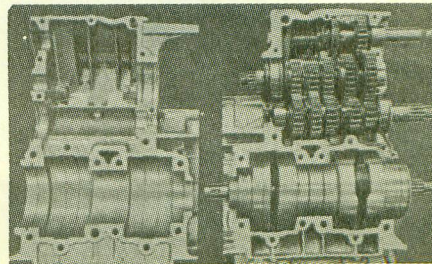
Gears and shafts should stay in place in the top half of crankcase when the lower half is lifted off.
